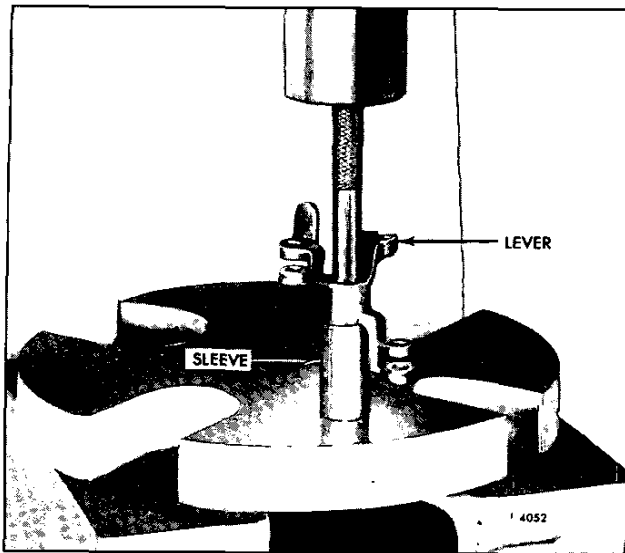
Removing or Installing Control Link Lever Bearings Using Tool J 8985
